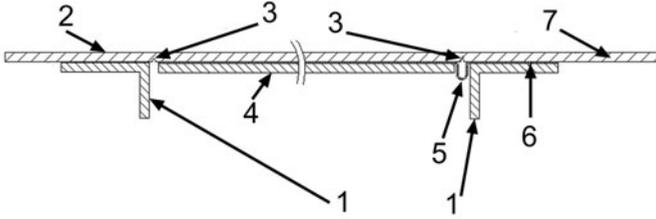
Section of a stiff dashboard with integrated cover: Dashboard shoot channel 1, embossed surface 2, tear-line 3, shoot channel movable part 4, fabric 5, shoot channel fixed part welding with the dashboard 6, dashboard 7.
